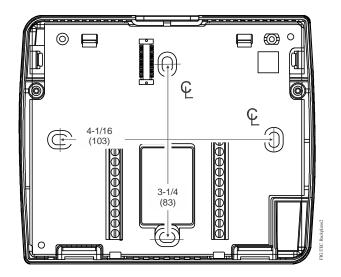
Mounting Hole Locations, Dimensions, in. (mm)
